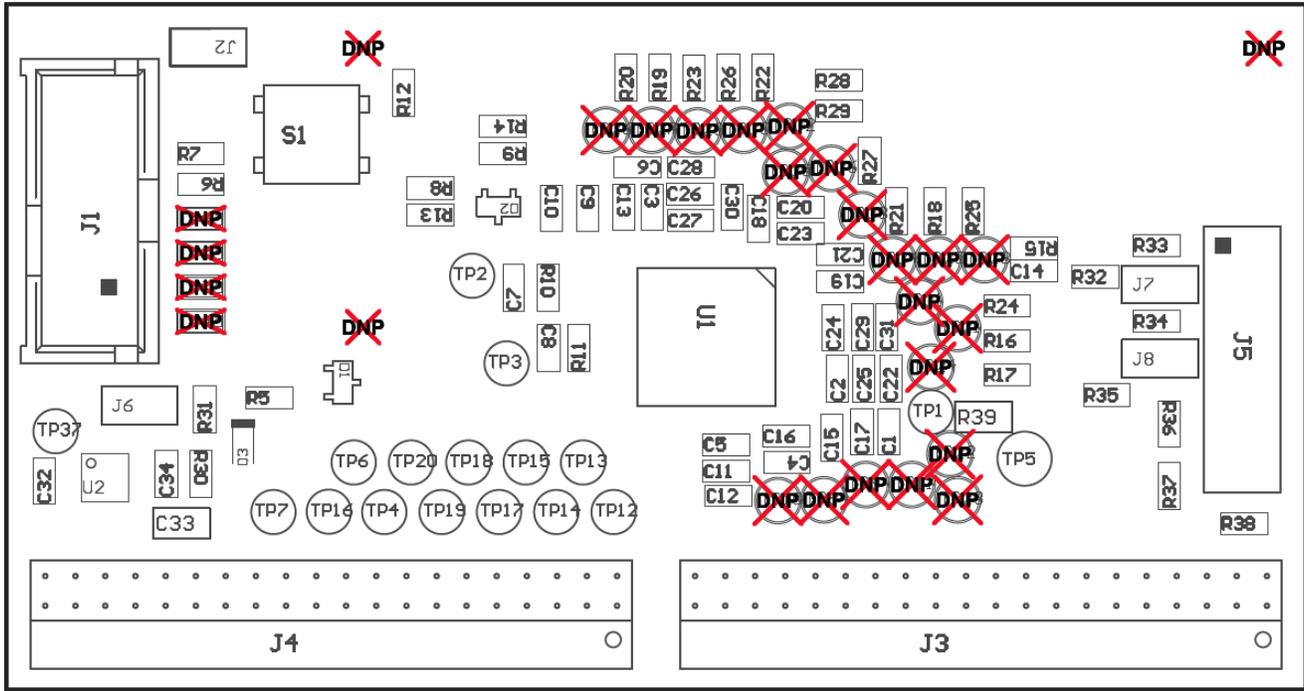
UCD3138064AEVM149 Top Layer Assembly Drawing (Top View)
